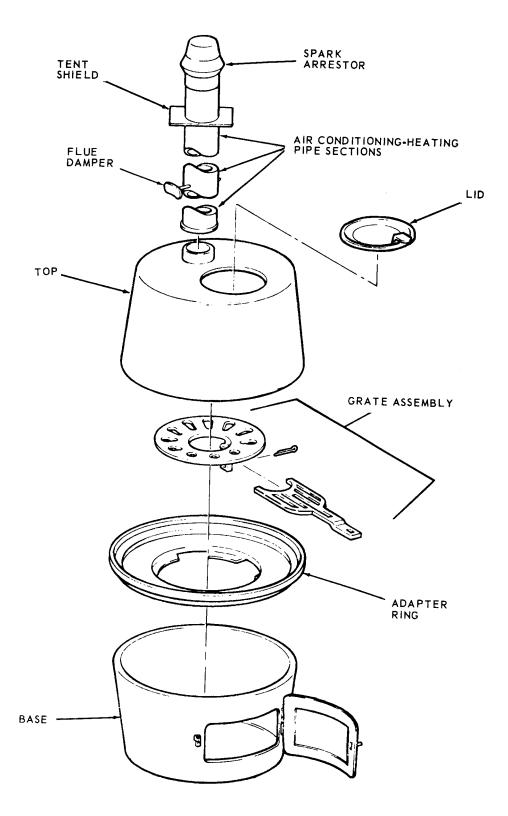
Space heater installatin (Type I without Conversion Kit installed) (Sheet 1 of 4).
